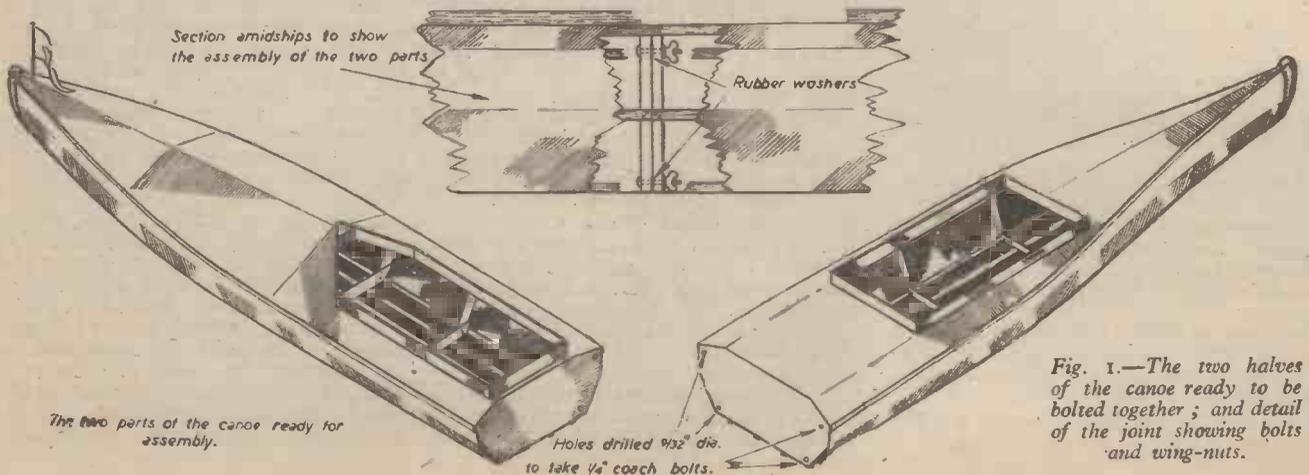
The two halves of the canoe ready to be bolted together; and detail of the joint showing bolts and wing-nuts.
